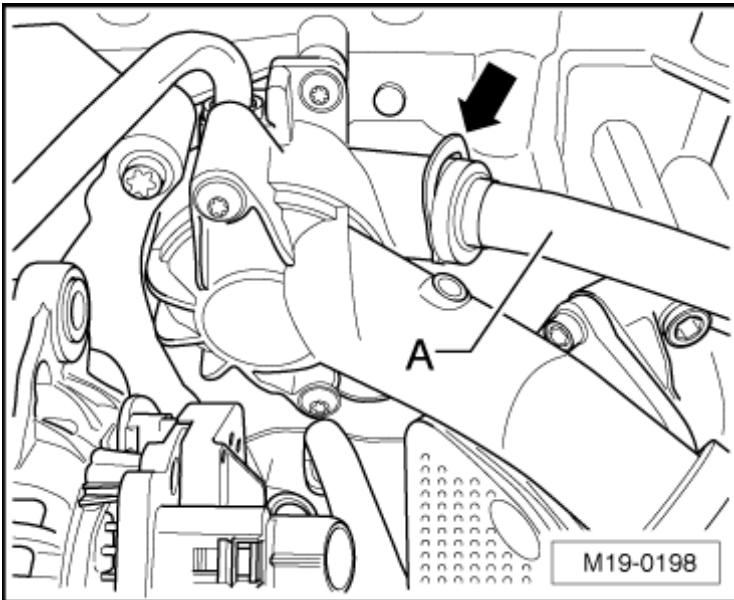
Identifying Retaining Clip And Coolant Pipe
